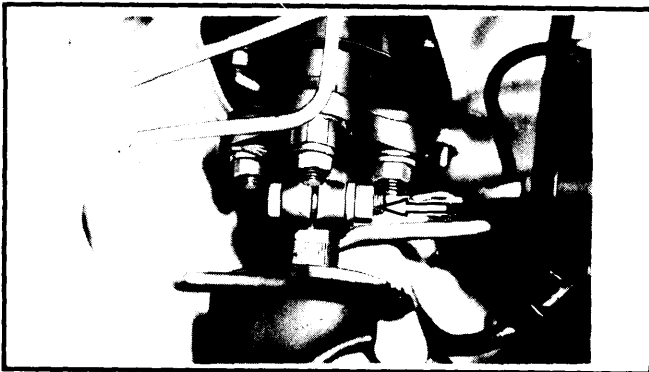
Pinch Bolt Mounting Mainshaft to Steering Gear
